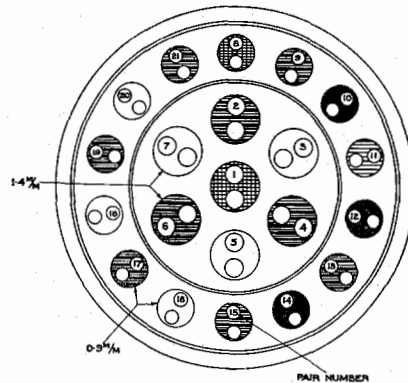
Cross Section of Cable, Jarna-Falköping Section
